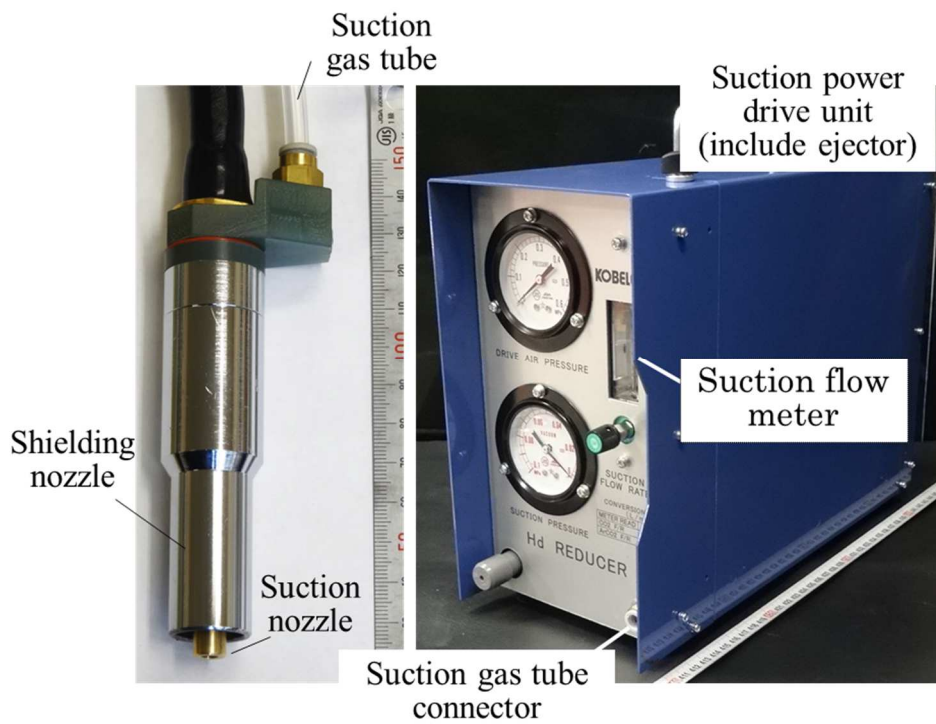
Appearance of a prototype of welding torch system
